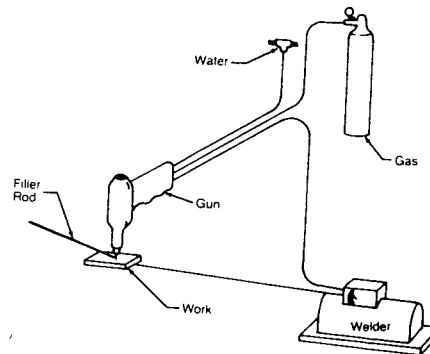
Inert-gas shielded tungsten-arc welding (TIG)
